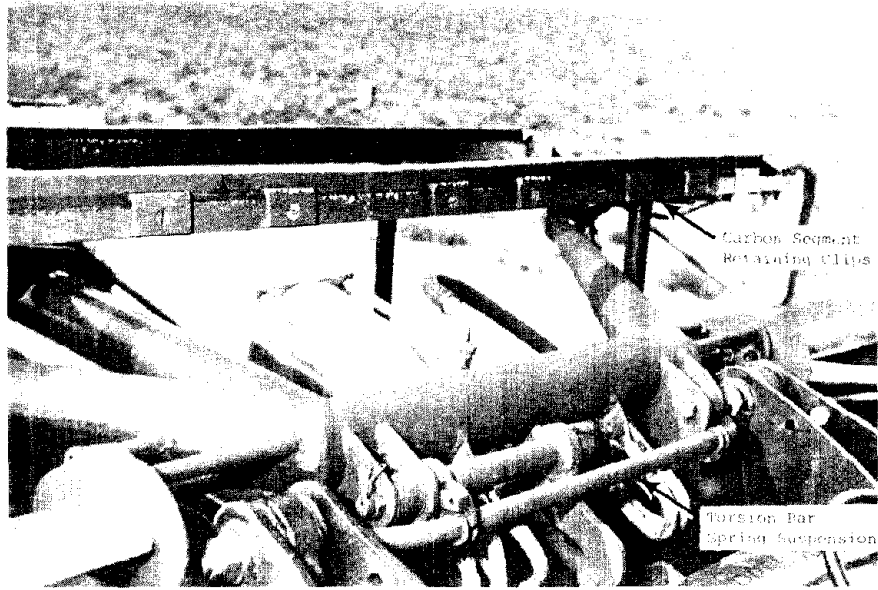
THE BR/BW UPPER ARM ASSEMBLY.
